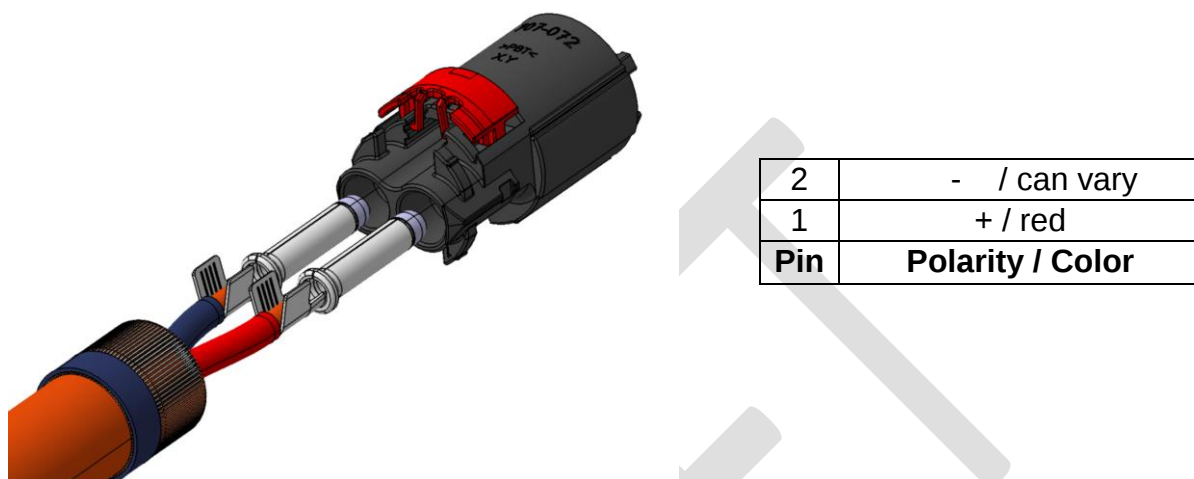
Assembly the HCT4short male into the ASSY Contact-Holder
